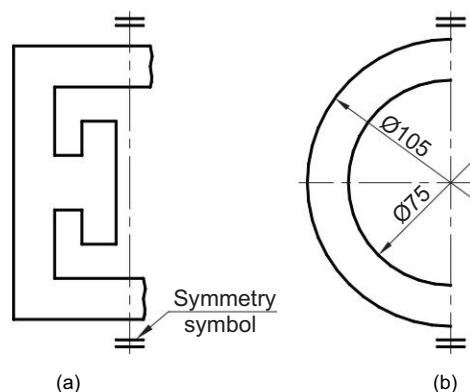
(a) and (b) Partial drawn view dimensioning
